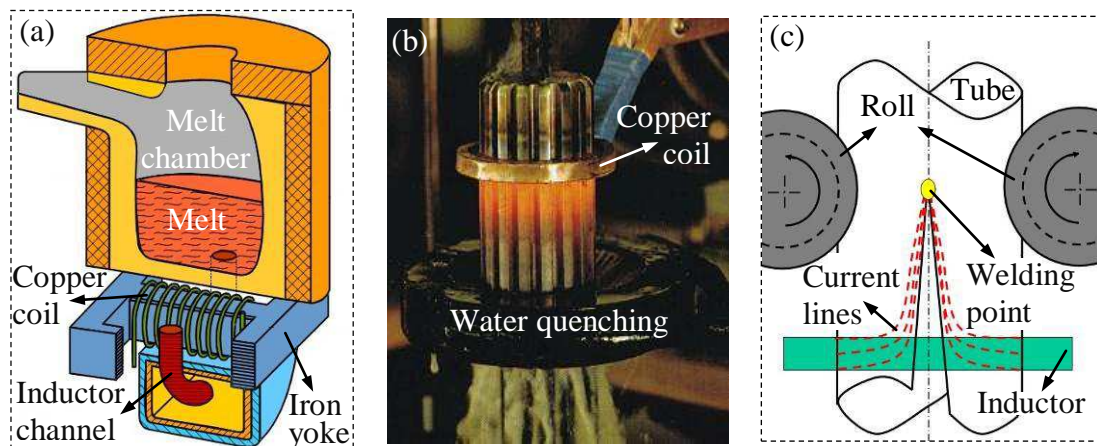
(a) Induction channel furnace; (b) Induction heating surface harden; (c) Induction welding.
